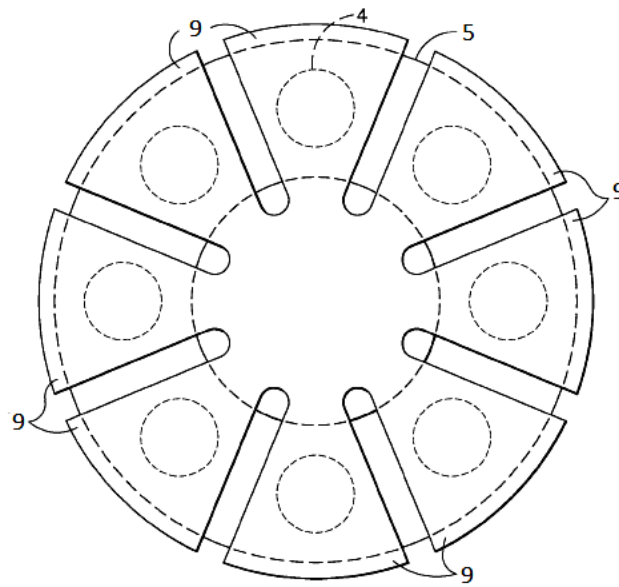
Frontal View of Axial Piston pump scheme. (28)
